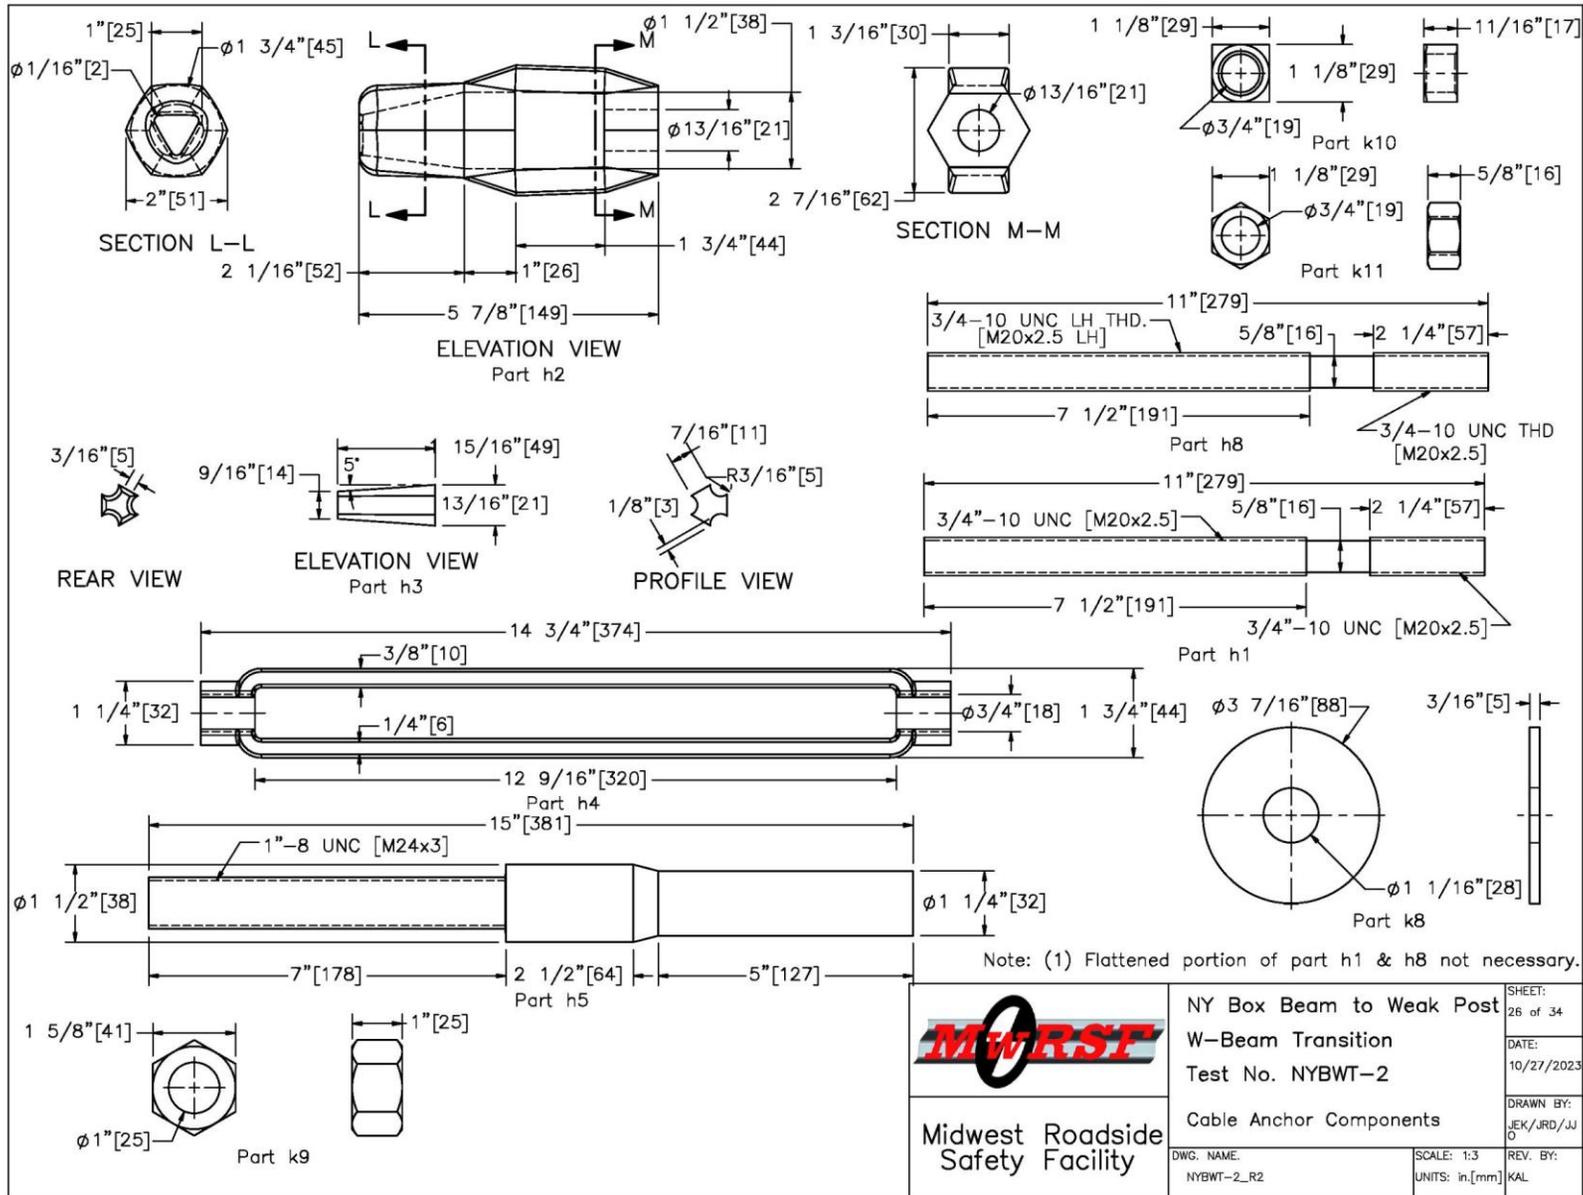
Cable Anchor Components, Test No. NYBWT-2
